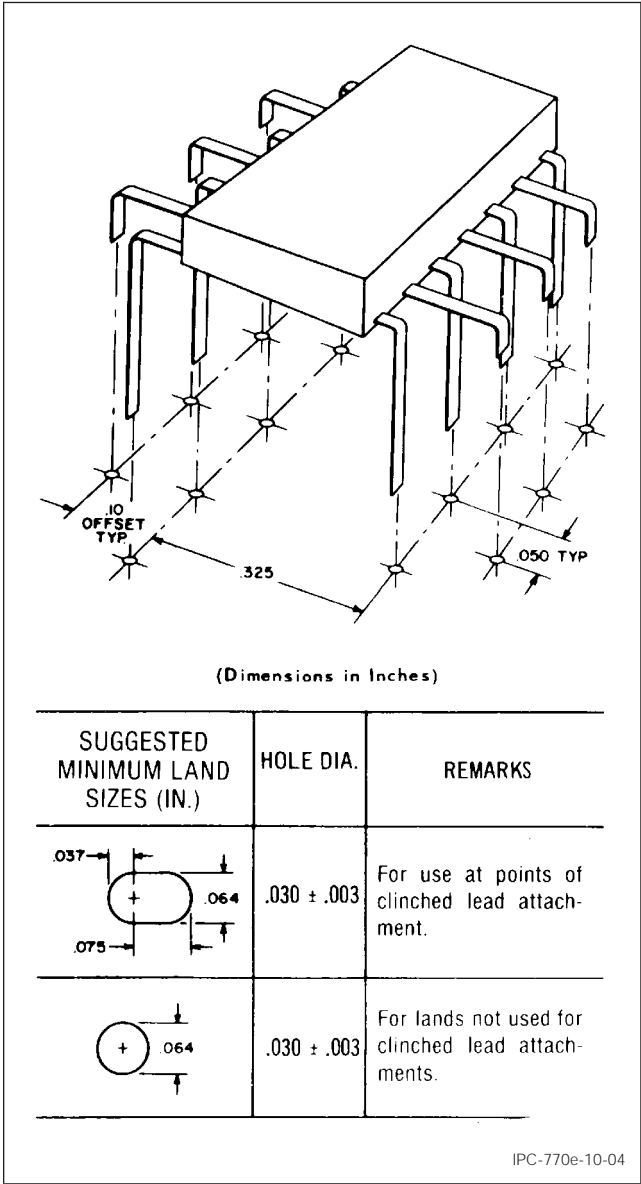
Staggered Hole Pattern Mounting (Flatpack Outline Drawing)
